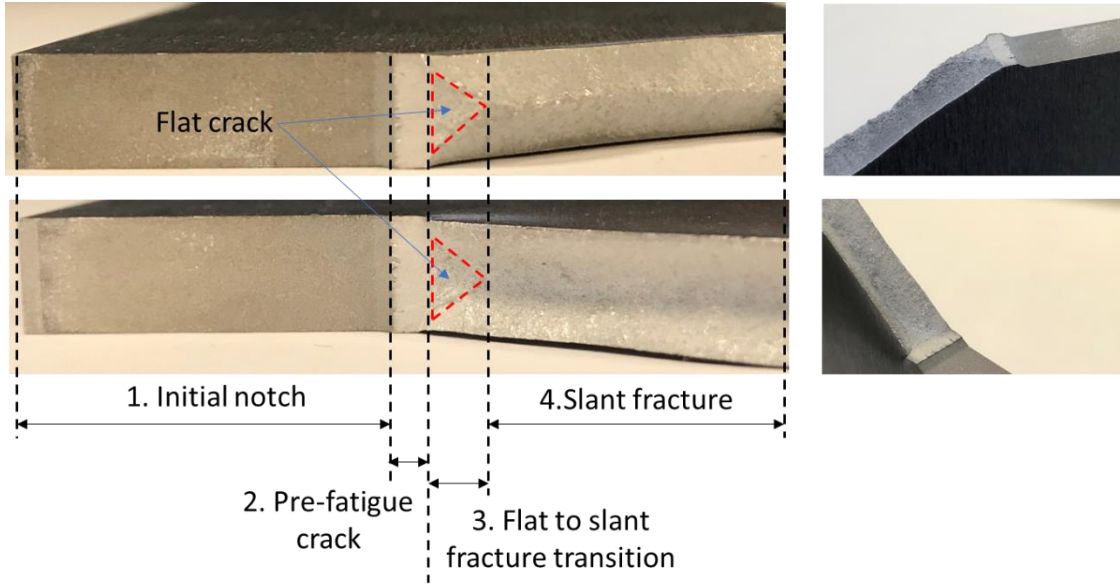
9 Fracture surface of the unrepaired specimen.
